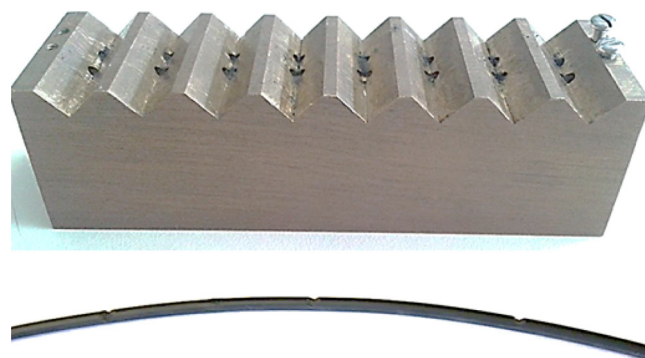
Brass mold used to create the grooves in the POF, and a detail of the POF with the grooves is shown below the mold photograph.
